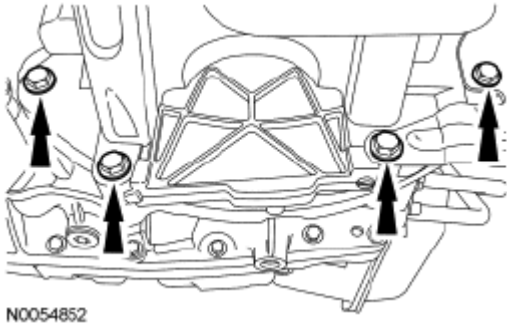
Locating Oil Pan-To-Transaxle Bolts
